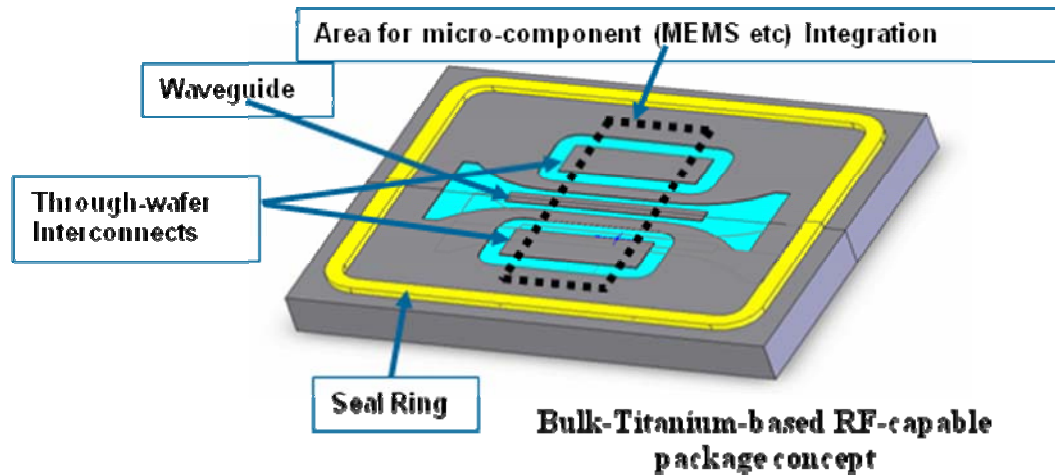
Bulk-titanium packaged waveguide with interconnects and seal ring for packaging
